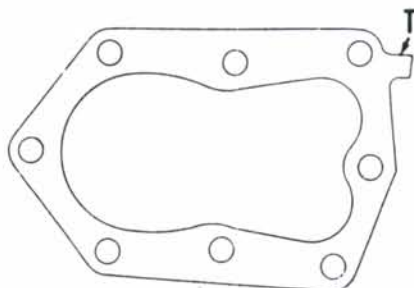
Install head gasket on MF260 models so tab (T) is towards flywheel side of engine.
